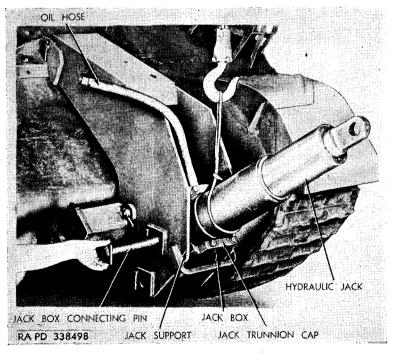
Installing hydraulic jack and jack box to jack support—bulldozer M1A1.
